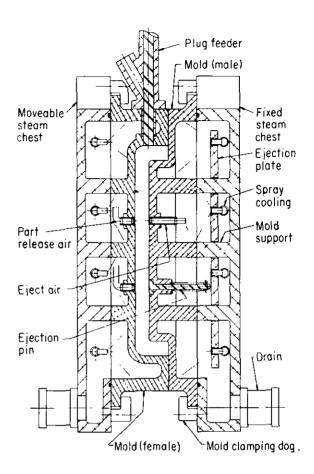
Typical expandable polystyrene mold mounted on steam chest.
